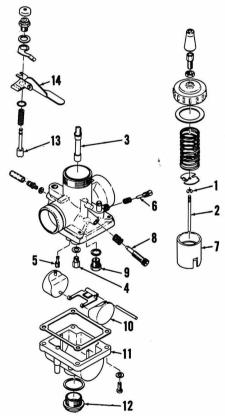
Exploded view of carburetor used on R5 models.
